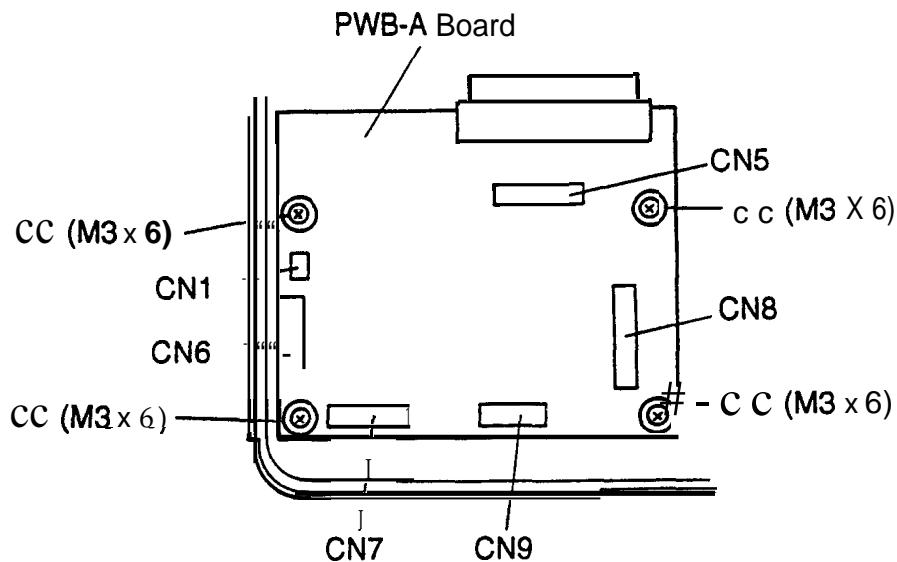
Removing the Engine Controller Board (PWB-A)
